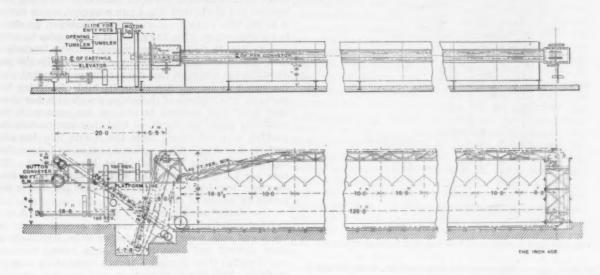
Plan and Side Elevation of Castings and Packing Elevators and Conveyors.
